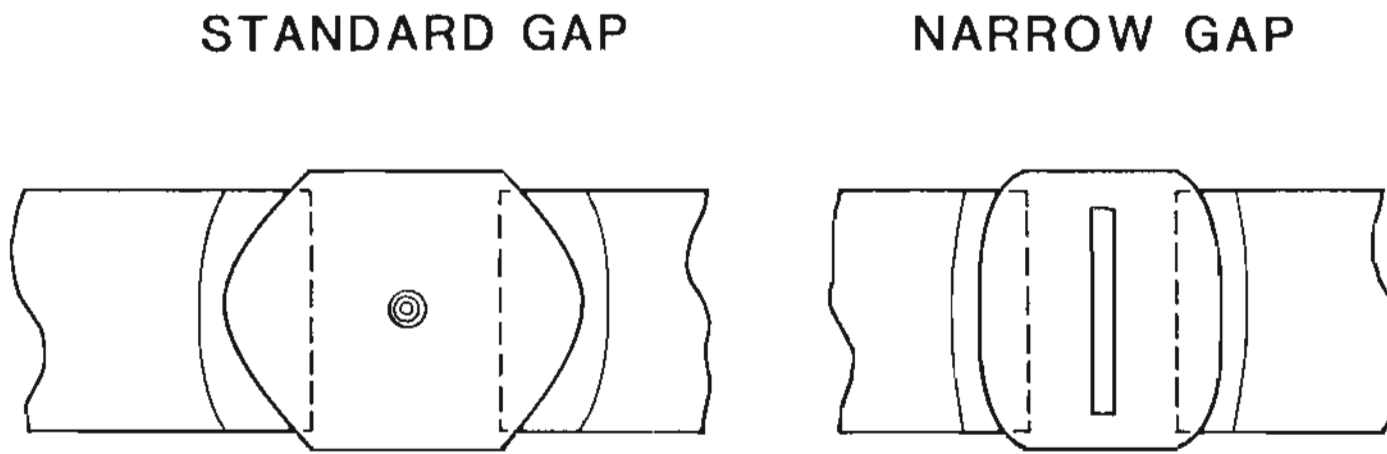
Schematic sketch of base metal penetration, dilution and HAZ size between standard weld and narrow gap weld
